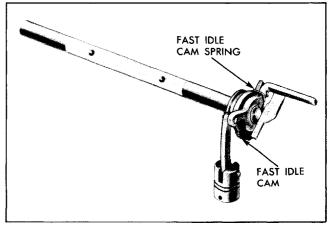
B-19 Choke Piston, Shaft and Fast Idle Cam Assembly—Carter
